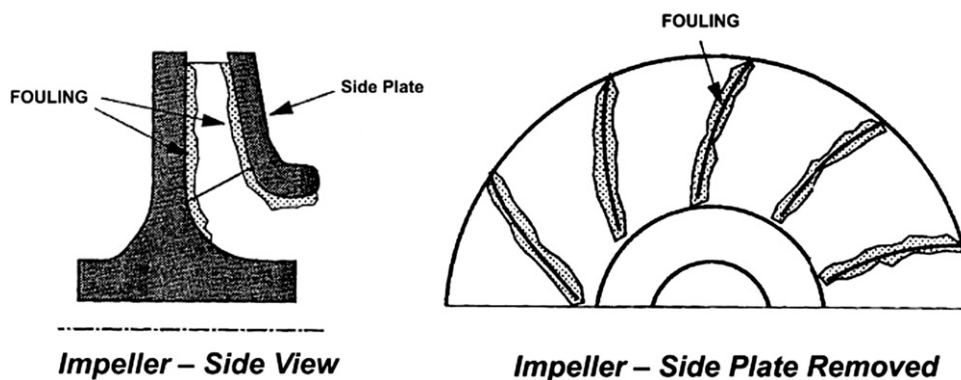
• Fouling – the effect on the operating point. Left: impeller – side view. Right: impeller – side plate removed
